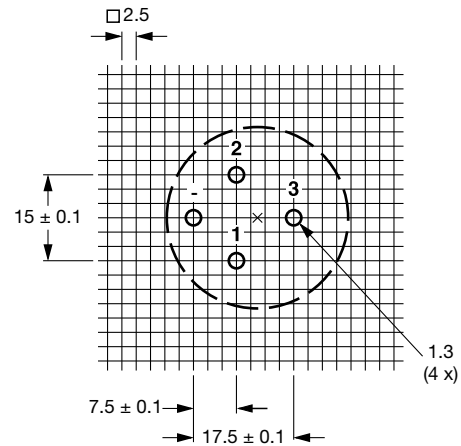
Mounting hole diagram viewed from component side (case Ø D = 35 mm)
